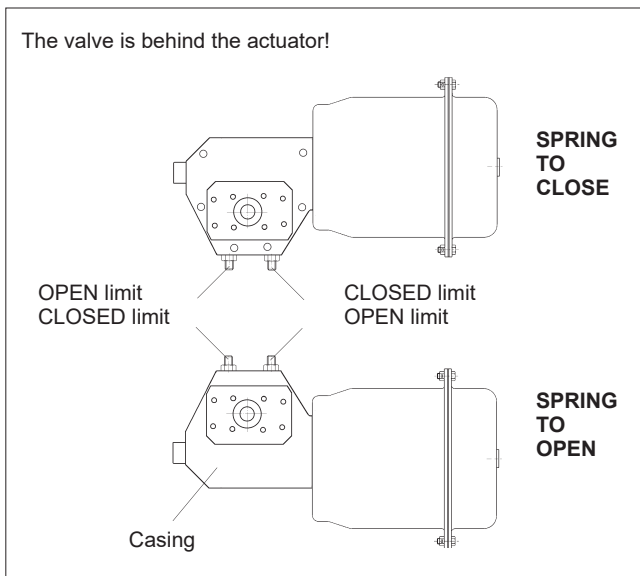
Installation of a Quadra-Powr actuator and adjustment of the open and closed limits
